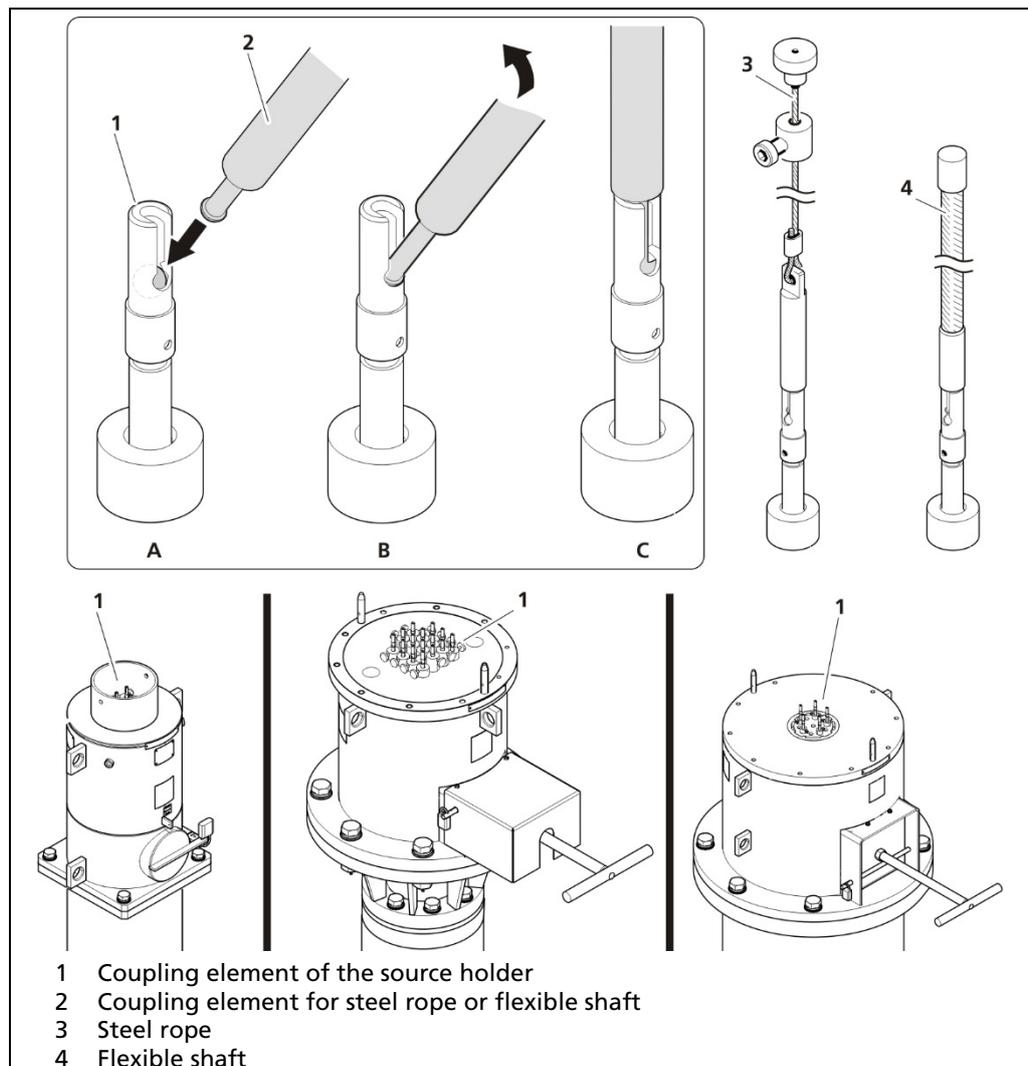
Latching the steel rope or the flexible shaft into the source holder
